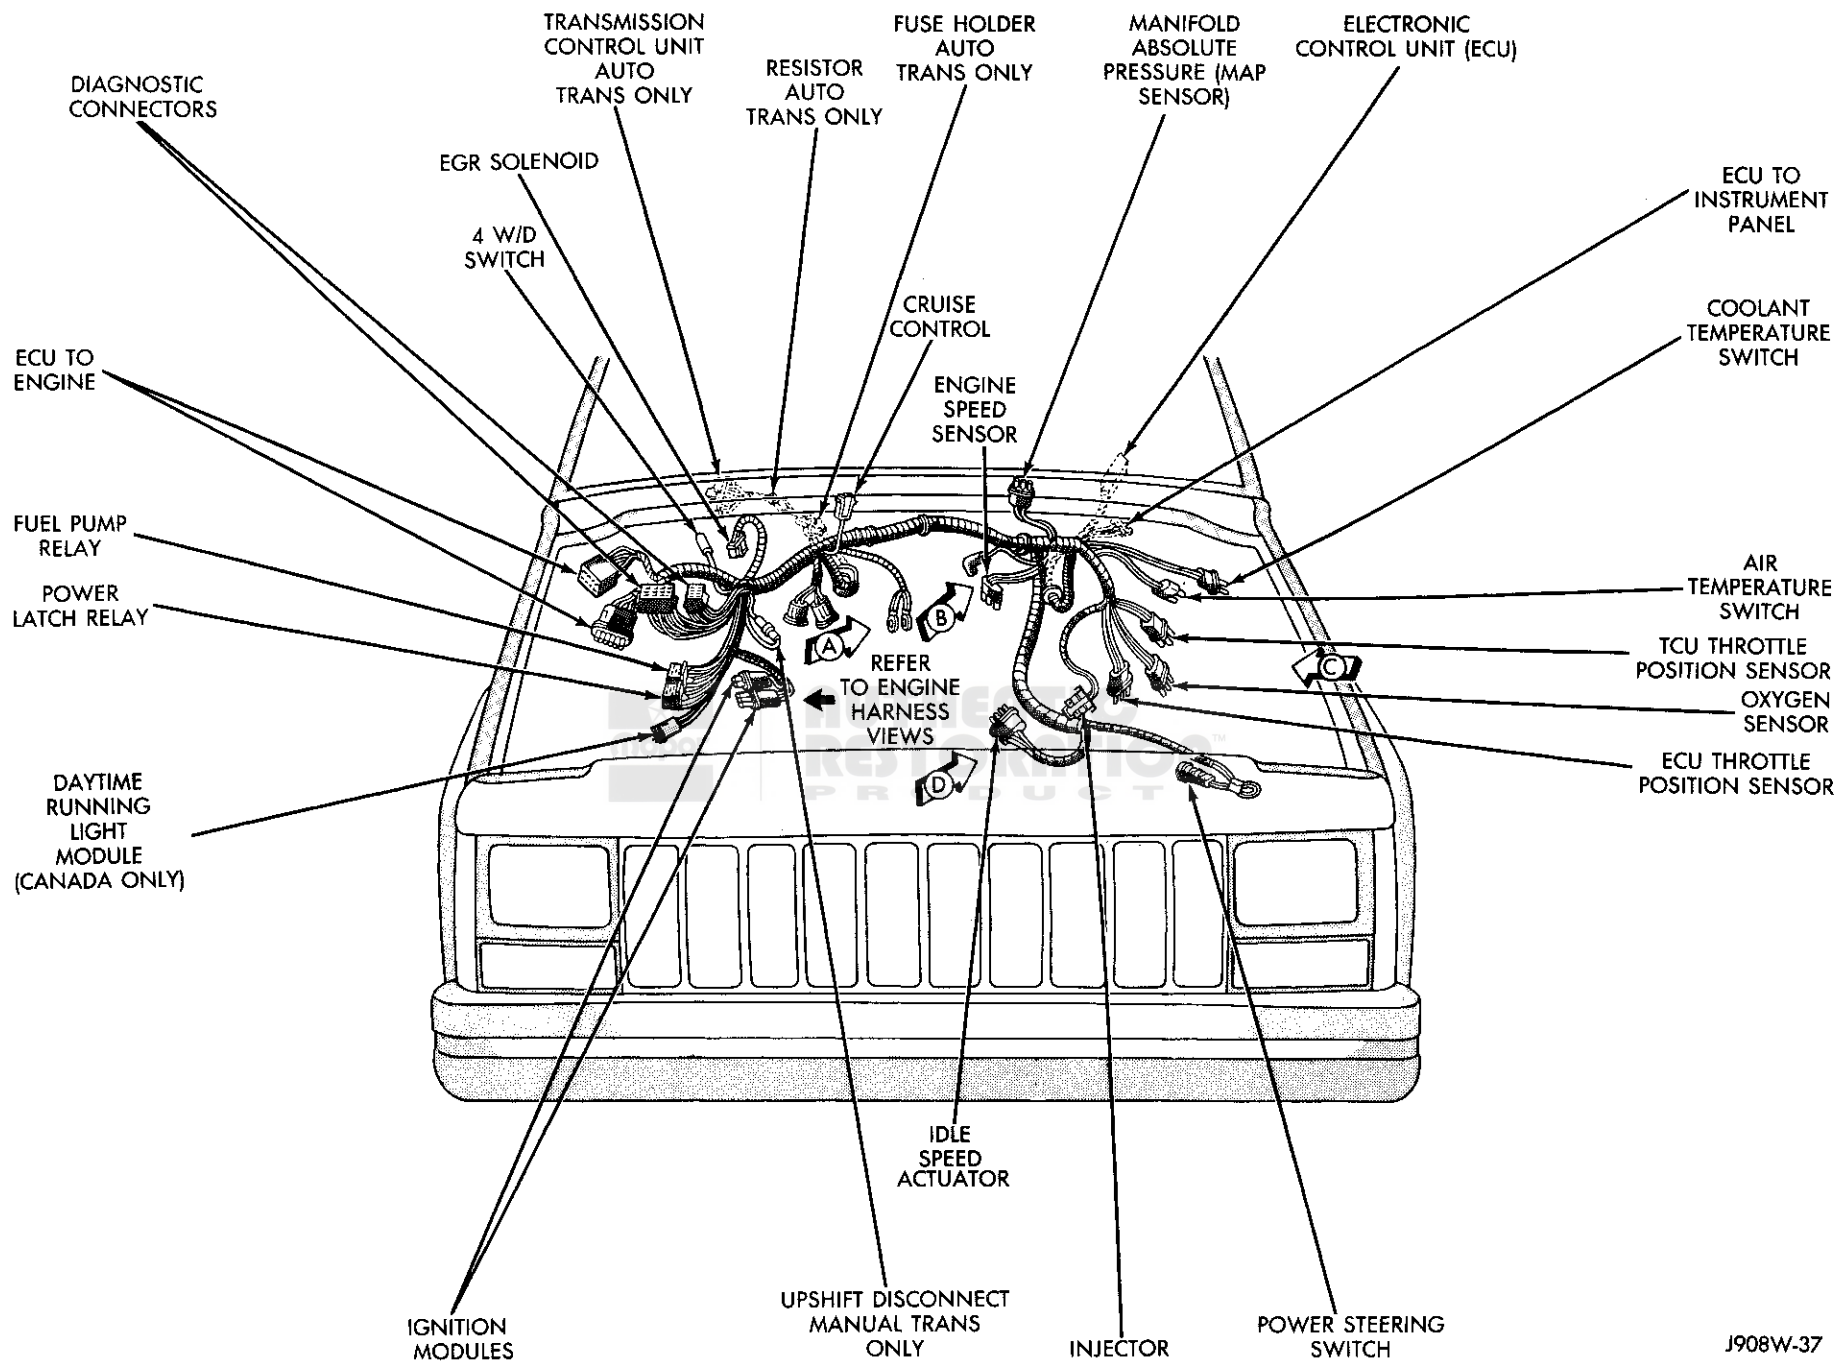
Engine Compartment Wiring 2.5L Engine - MJ, XJ
